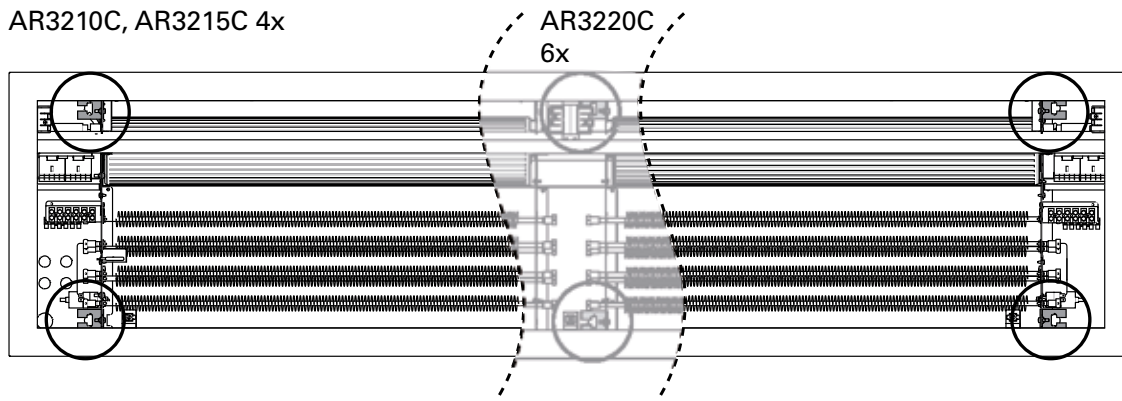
Location of the mounting brackets on the inside of the unit.
